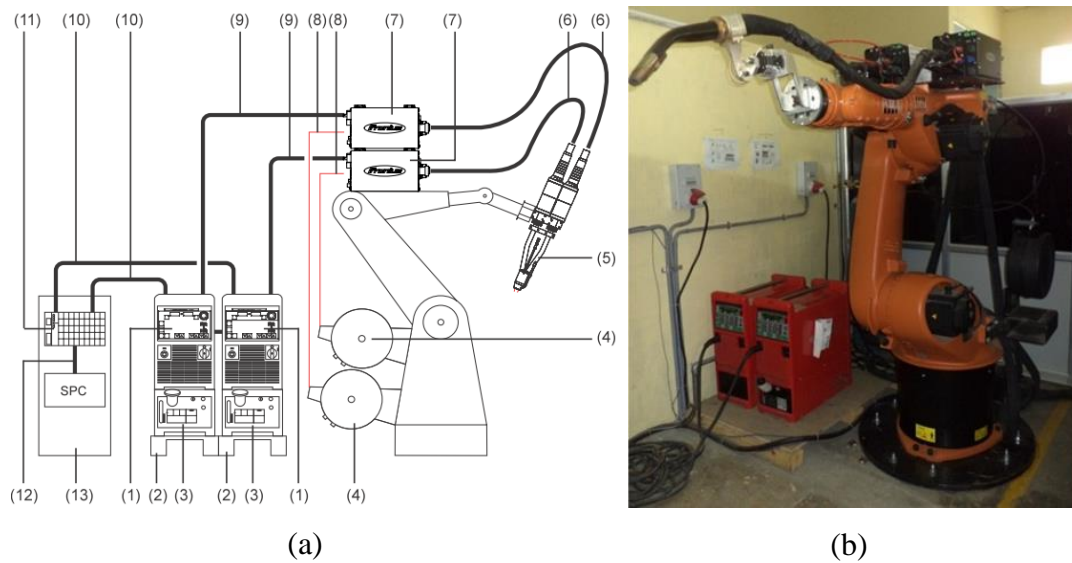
(a) Simple drawing of integrated robot and weld set up (b) complete experimental set up of TWAM.
